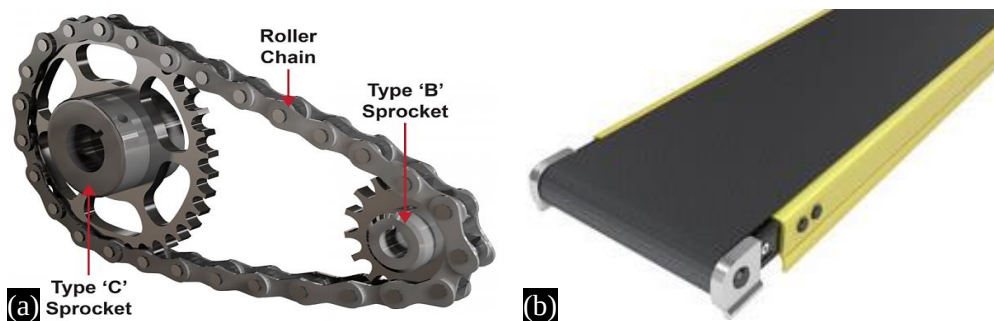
(a) chain drive mechanism, (b) conveyor systems.
